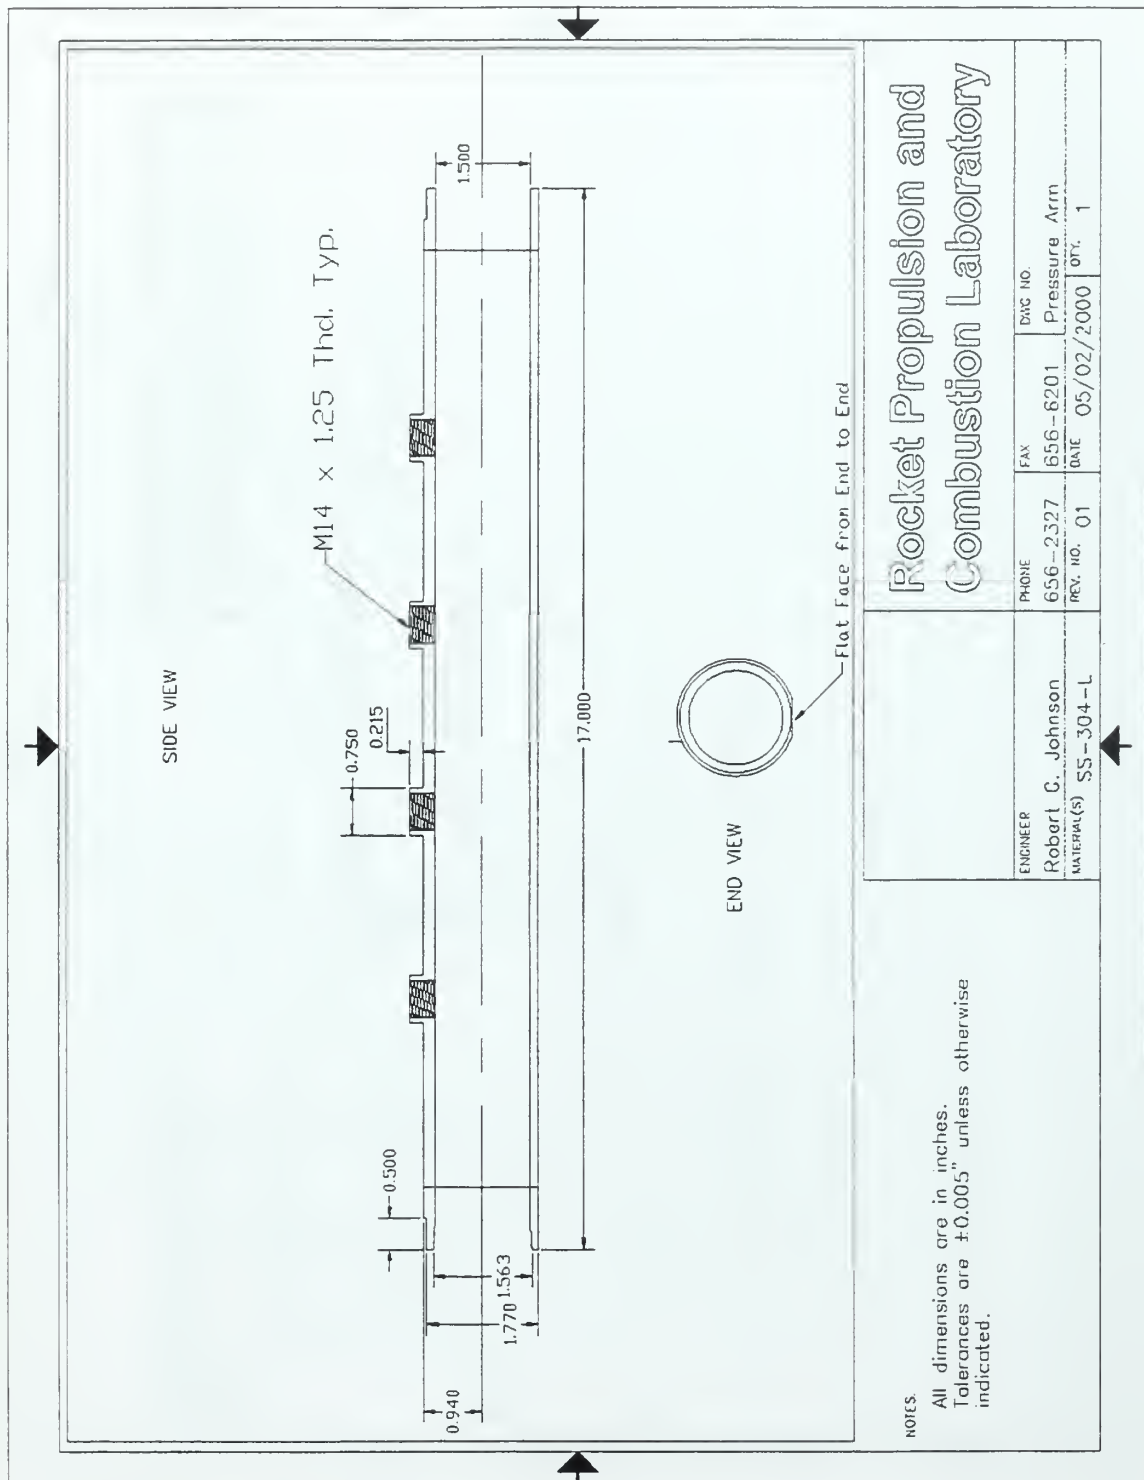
This main air arm was specifically designed with welded pressure bosses to allow the operator to measure pressure waves that may be propagating backwards in the engine.
